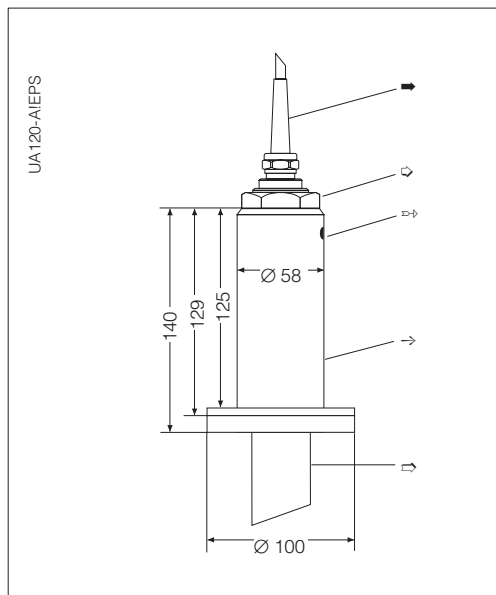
Sensor CUS 5 with adapter CUA 120-A for round flange installation DN 50
